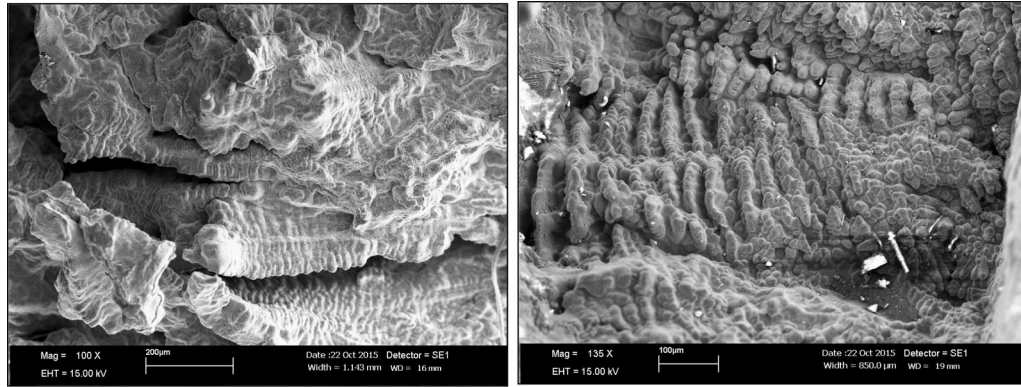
Overview of the fracture surfaces of Steel-2.
